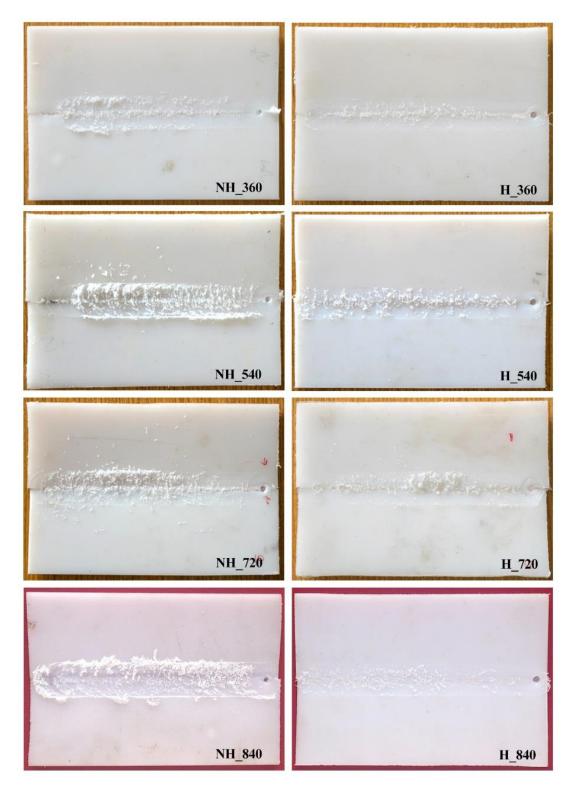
Welded samples joined using the tool without additional heating (NH) and with additional heating (H)
